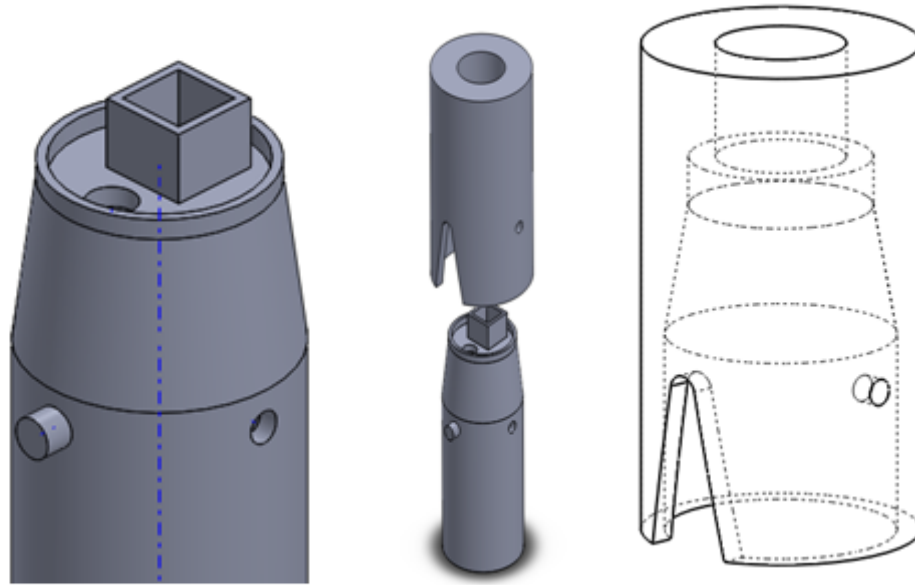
Early sketch for a rotating nub and slot mechanism for the universal tool mount.
